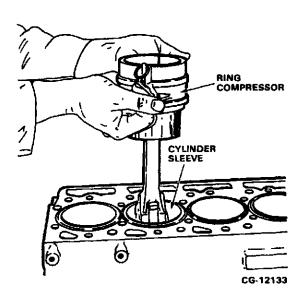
Place Piston and Rod into Cylinder Sleeve
